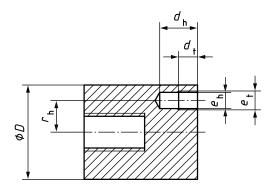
Geometrical dimensions for unbalance holes in type 18 cone test wheels
